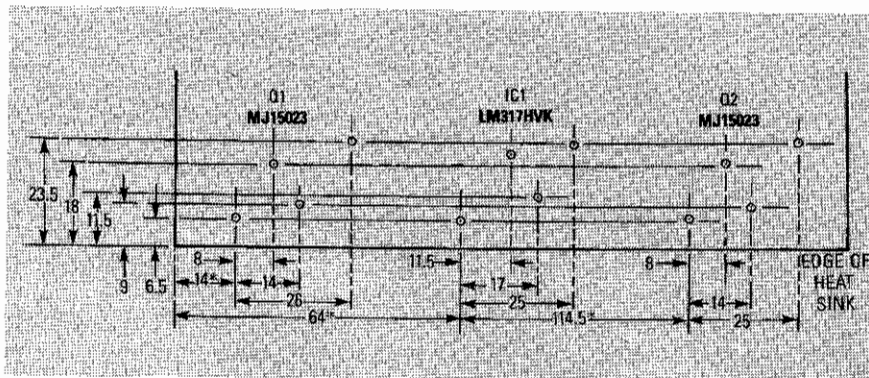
POWER SUPPLY HEAT SINK LAYOUT. All marked dimensions are in millimeters, all mounting holes are 1/4-inch in diameter, all lead holes are 3/16-inch in diameter, and add 3 mm to all dimensions with an (*) to align the PC boards.
